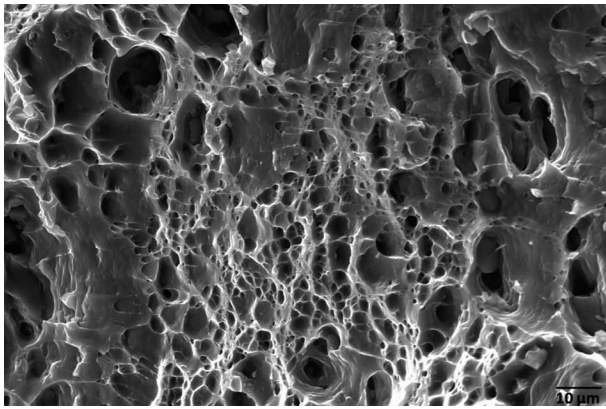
Another view of the fractograph of the AA2219 specimen in solution-treated condition for the specimen shown in Fig. 81
